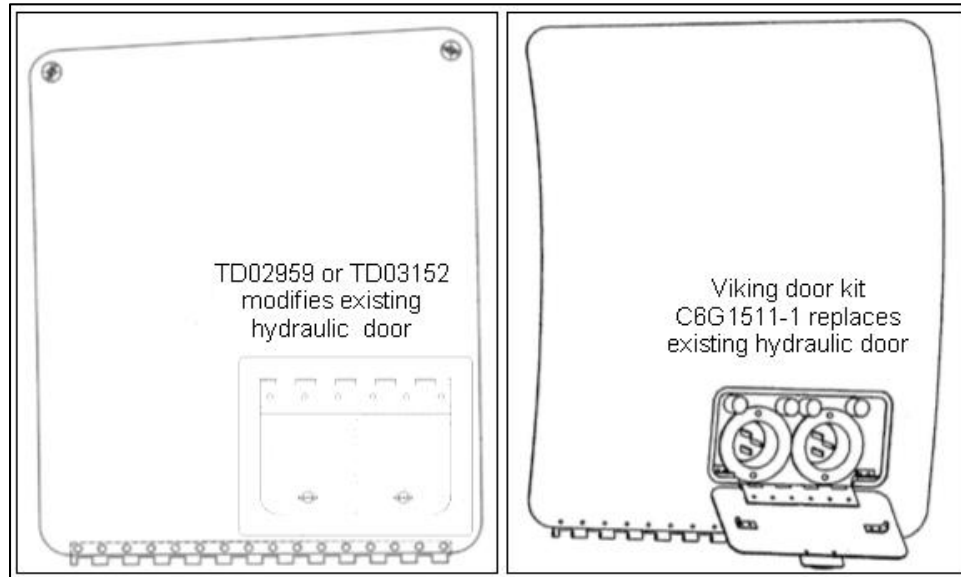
Available door kits TD02959, TD03152, and C6G1511-1. Location for the modification is below left forward crew door in an existing nonstructural (not primary structure) hydraulic bay access door/panel approximate STA 98, refer to Figure 1.
